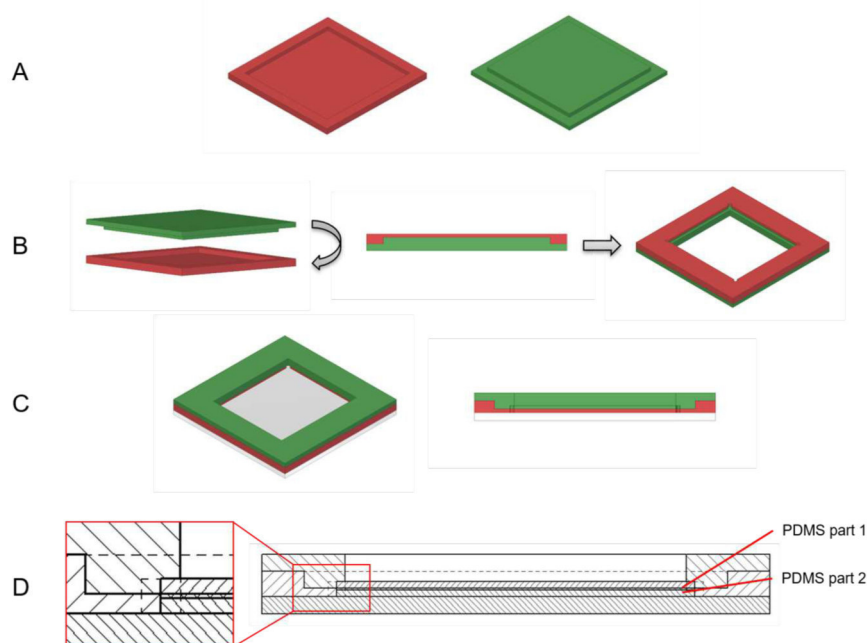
PMMA alignment holder fabrication steps. (A) Both a top (green) and a bottom (red) part were milled to fit each other. (B) An opening with the dimension of the AIMD was milled while both parts were bonded together, reversibly, with green tape. (C) A piece of PMMA was glued to the bottom part with UV curing adhesive. (D) A small area was left on the top part to support the PDMS part during the plasma exposure.
